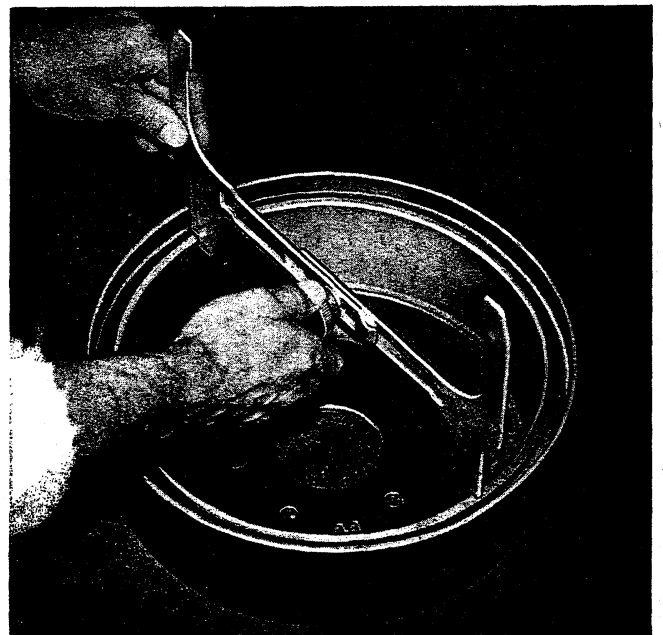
Using Drum-to-Brake Shoe Clearance Gauge Tool J-21177
